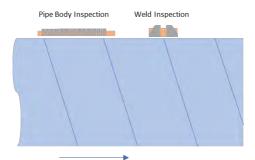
Arrangement for online inspection of Spiral Welded Tube.
